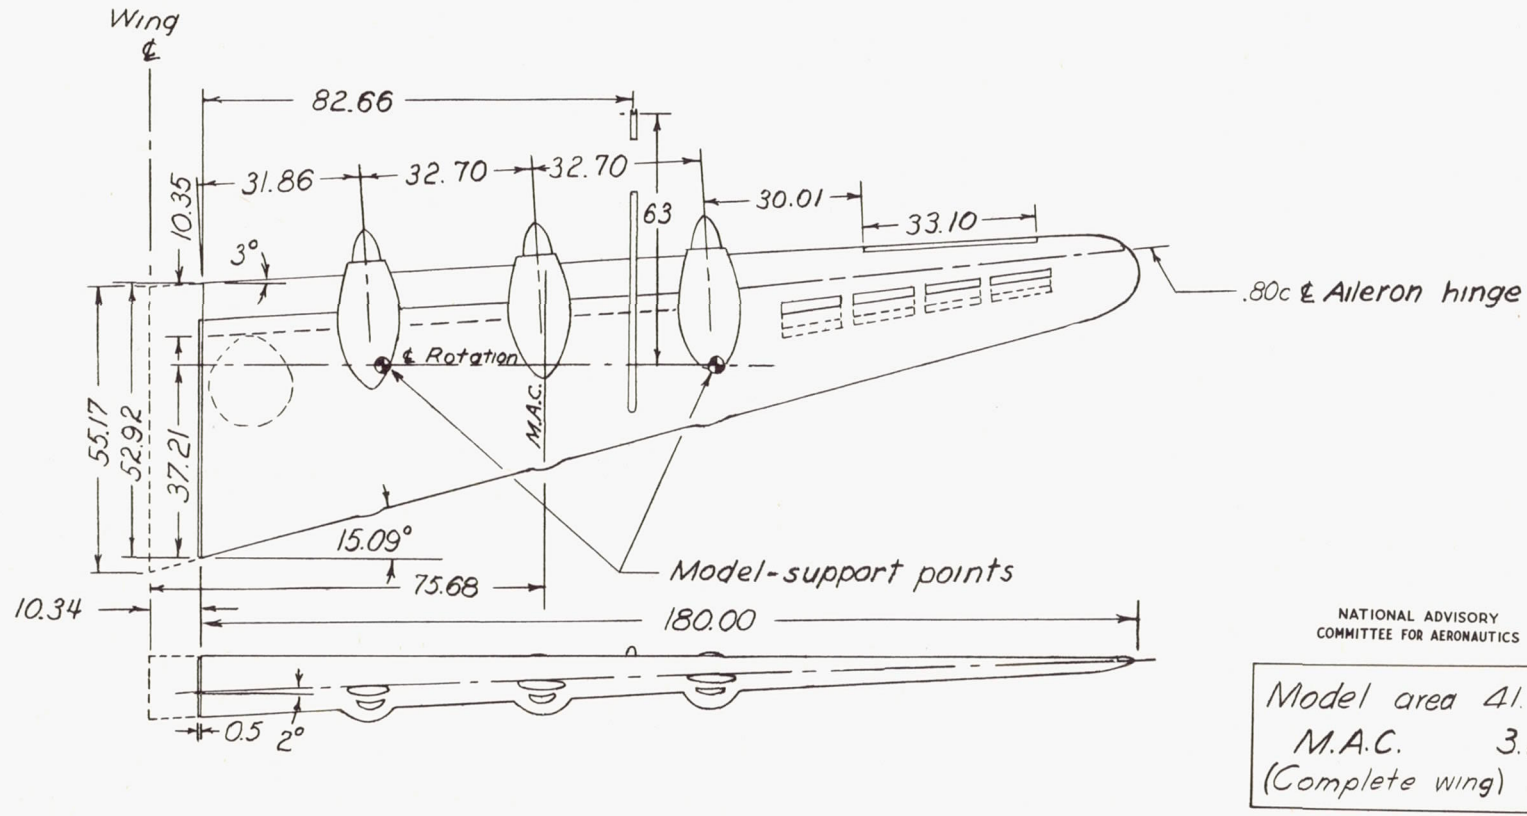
Plan and elevation of the partial-span wing model. (All dimensions in inches.)
